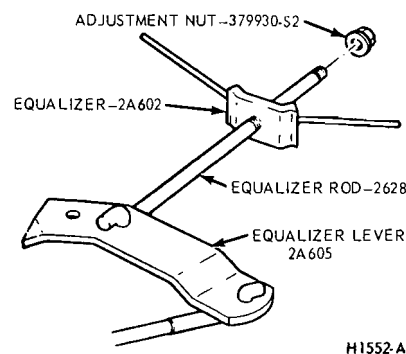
Parking Brake Linkage Adjustment — Mustang and Cougar
